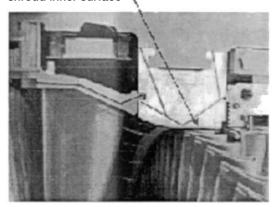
Stage 1 shroud blocks installed in turbine. (Chupp et al., 2002.) Courtesy GE.
